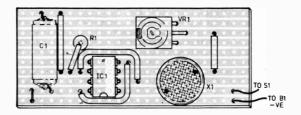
Component layout and Veroboard cuts for the transmitter of Fig. 2
